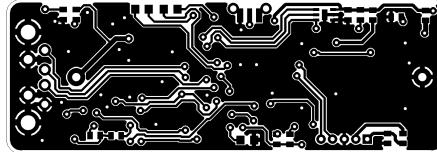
Second μPINPoint prototype PCB artwork bottom layer (actual size).
